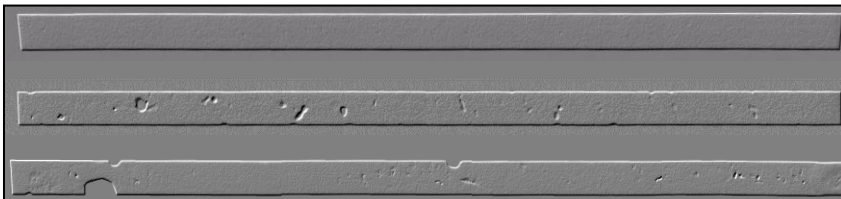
X-Ray Inspection of Solder Test Specimens (Good and Bad Samples)
